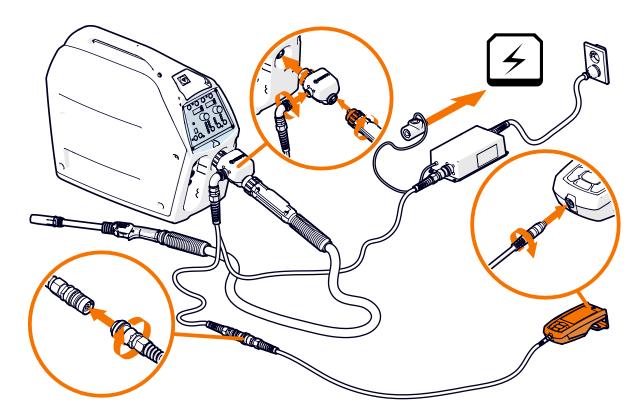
Connecting ARC Euro Adapter and Smart Reader to welding machine
